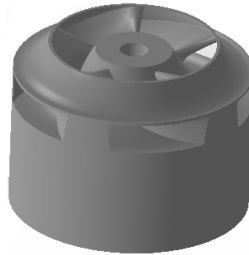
A shrouded 5 bladed impeller in SolidWorks
